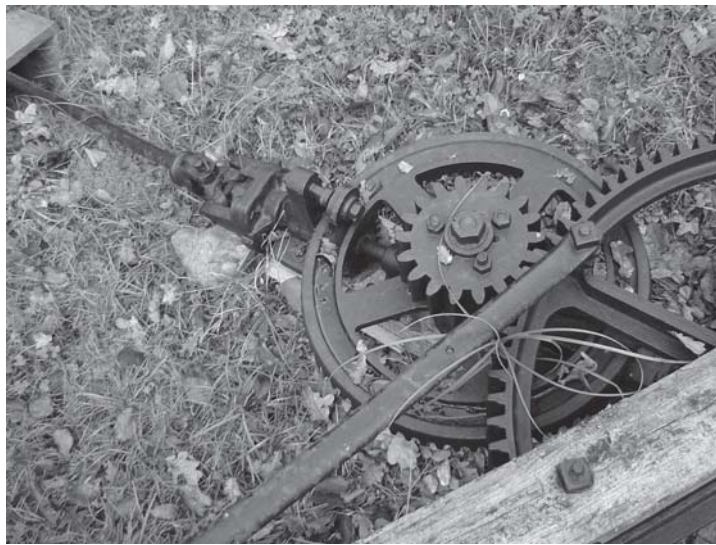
The assembly of the gear wheel with 86 teeth and respectively with 18 teeth.
